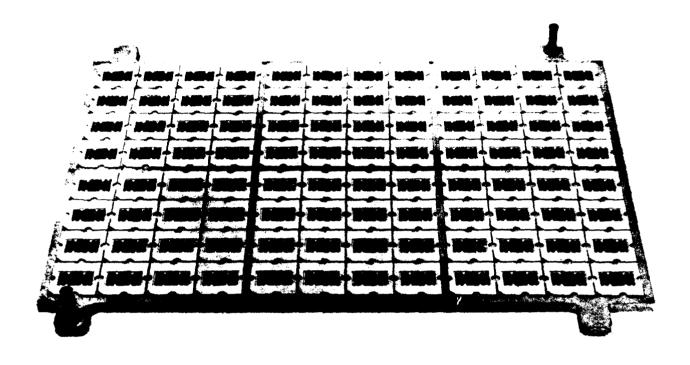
Burn-in Tray Populated with 96 Slide Carriers Prior to Assembly
